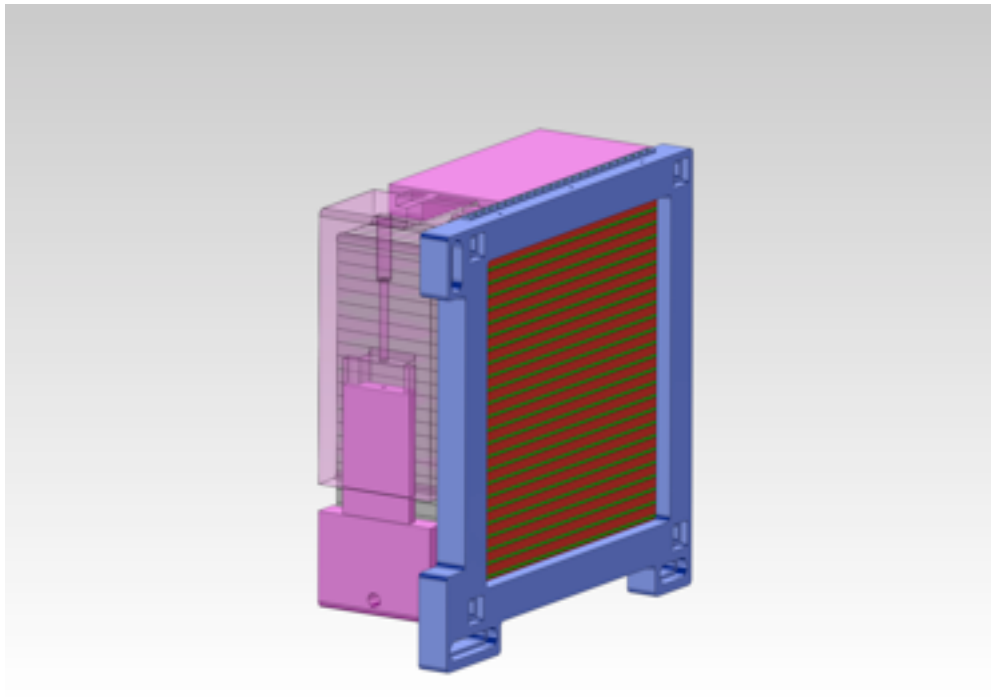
Fiber mounting assembly mounted in proximity to the crystal array.
